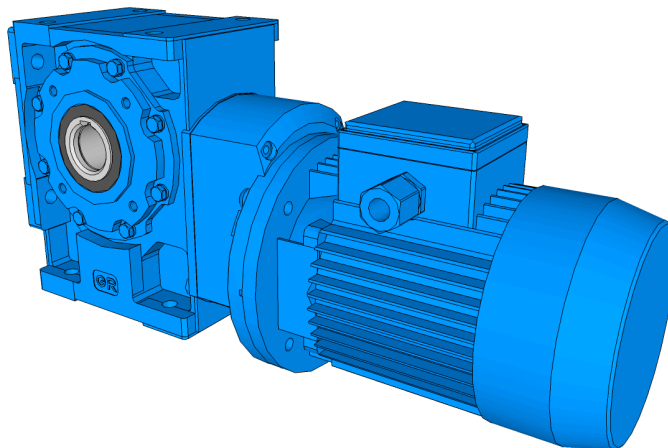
3D CAD drawing of a gearbox from Rossi SPA.
